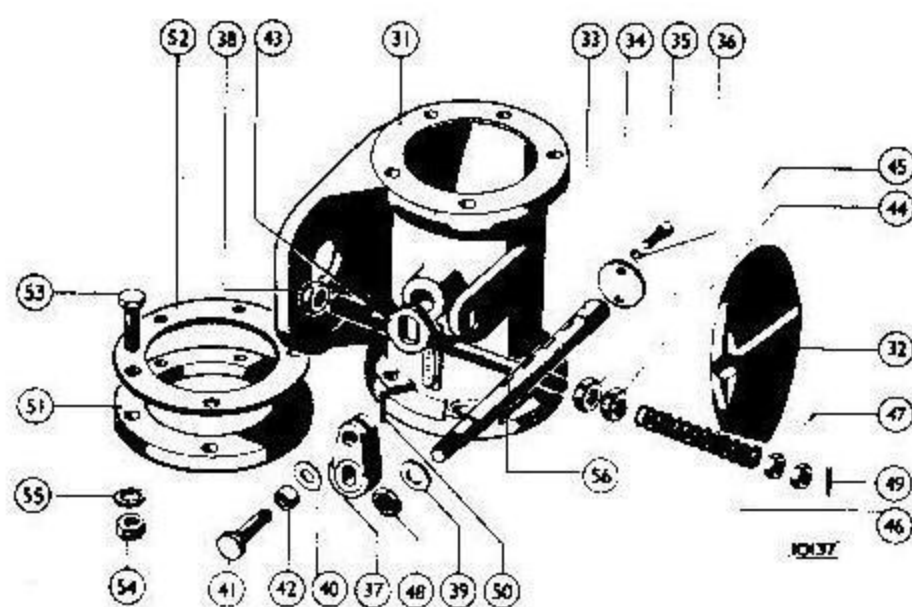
Exploded view of the Ashanco Exhaust Brake
